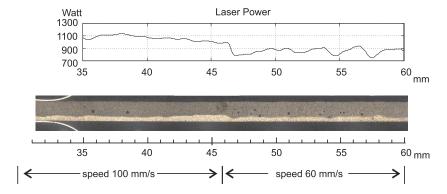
Longitudinal section of a controlled welding experiment and the corresponding laser power (actuator signal), which is low pass filtered at 20 Hz. The asked welding depth was set to 1.125 mm. Here the material used for the embedding of the sample is black, the weld is the dark grey area and the base material is visible as the light grey part
